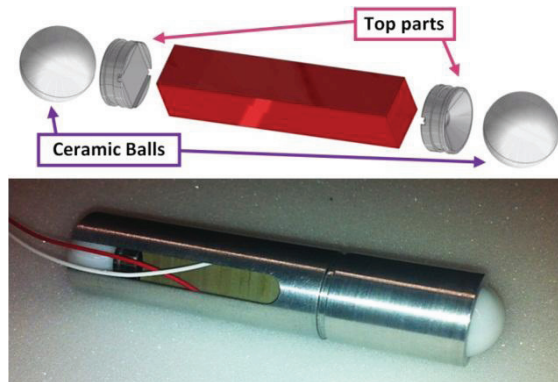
the piezo assembly CAD view (top) and picture with the protection tube encapsulation (bottom).
